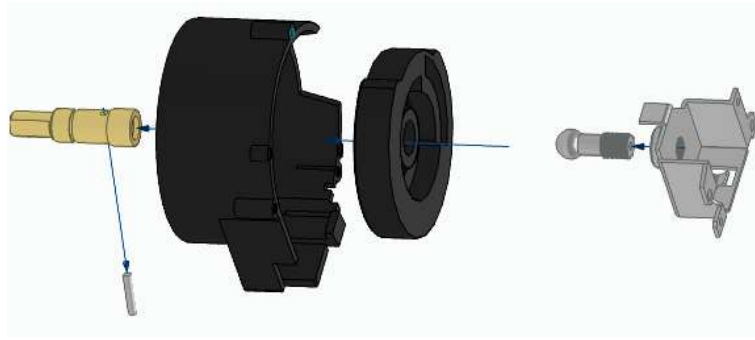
Redesigned Gate and Control Valve and its mounting Top Closure sub-assembly
